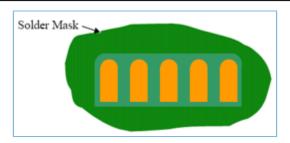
Solder mask definition for perimeter lands for 0.4 mm pitch parts
